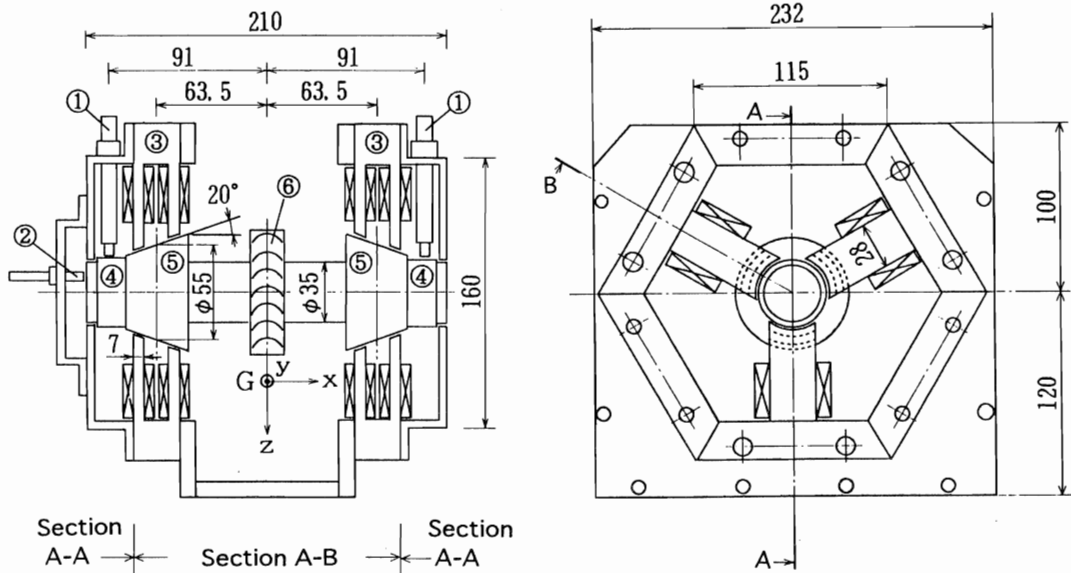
Cone-Shaped Bearings Composed of Six Electromagnets
